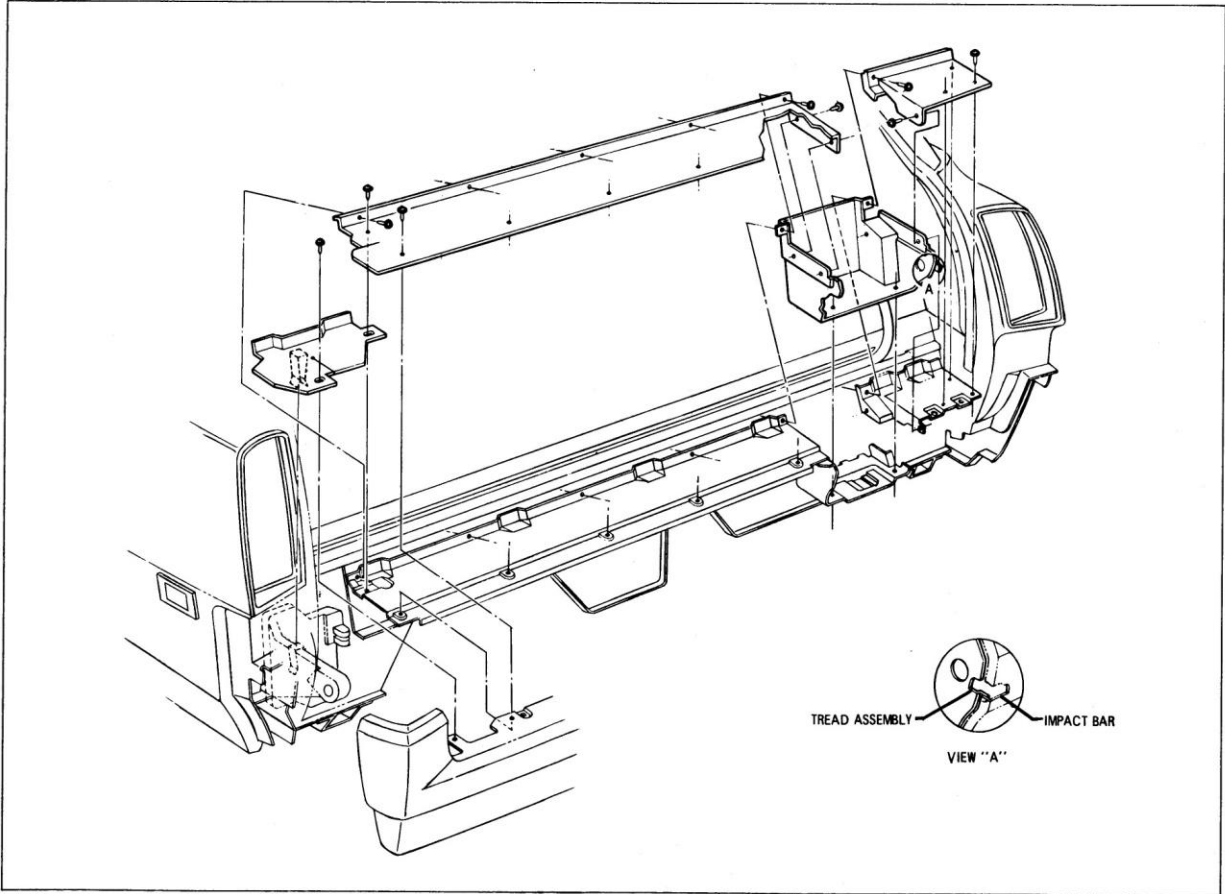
Pontiac Station Wagon Step and Tread Assembly
